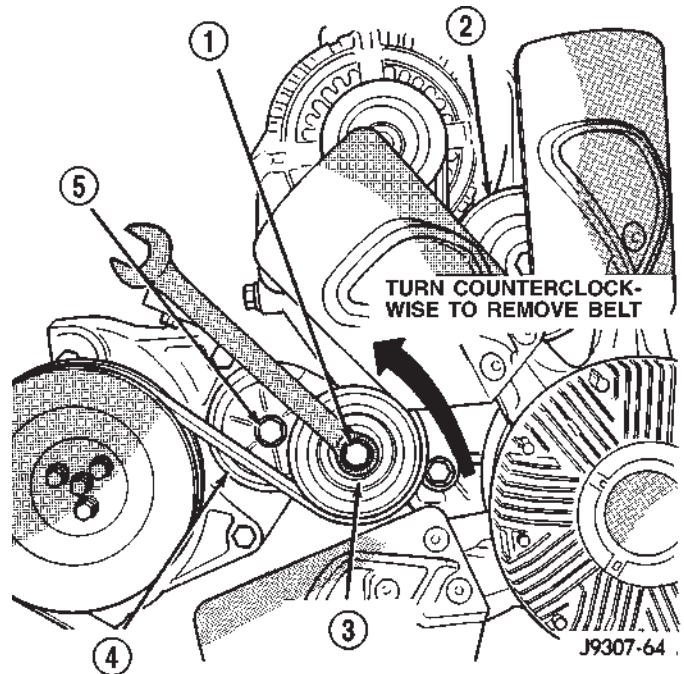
Belt Tensioner—5.9L HDC-Gas Engine
